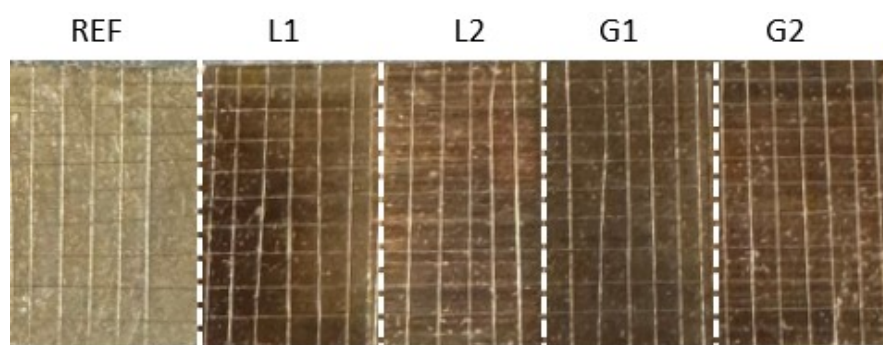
Macro image of the non-treated reference surface (REF) and laser textured surfaces (L1, L2, G1, G2) after the cross-cut tape adhesion test.
